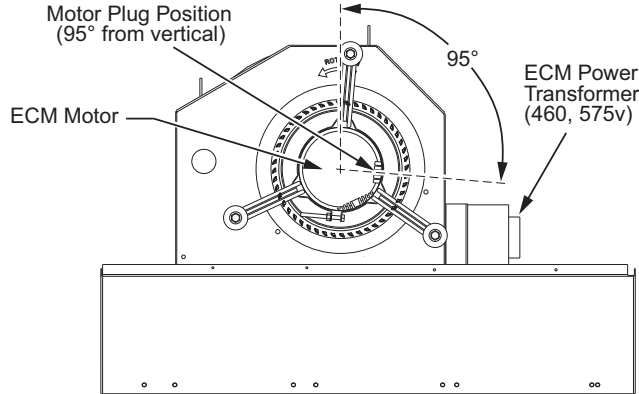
50HCQ Direct-Drive Supply Fan Assembly
